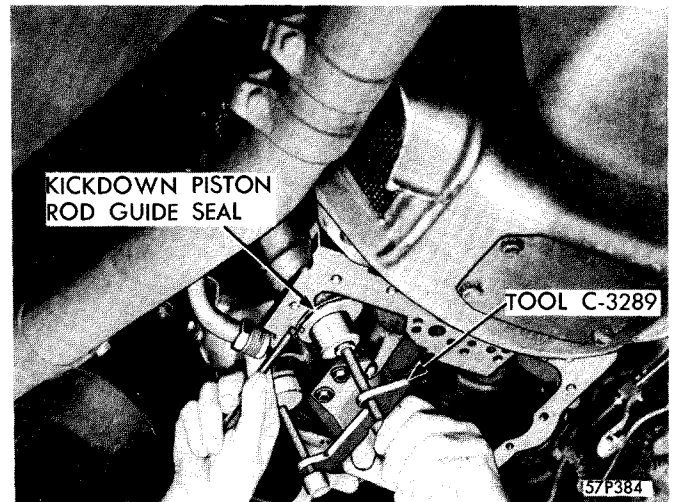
Positioning Kickdown Piston Rod Guide Seal (Typical View)
